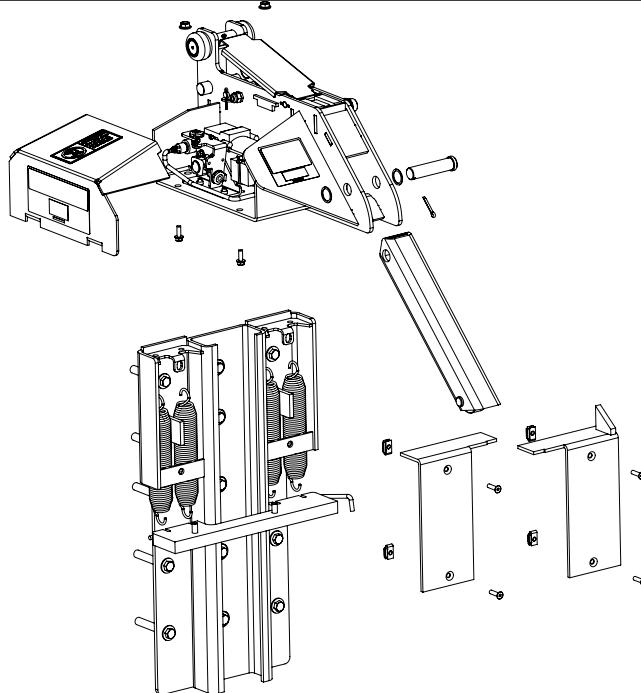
INSTALLING CARRIAGE ASSEMBLY INTO ROLLER TRACK
